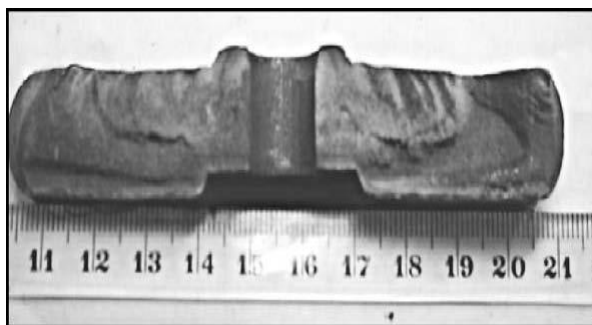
Photograph of the fracture surface in the second leaf
